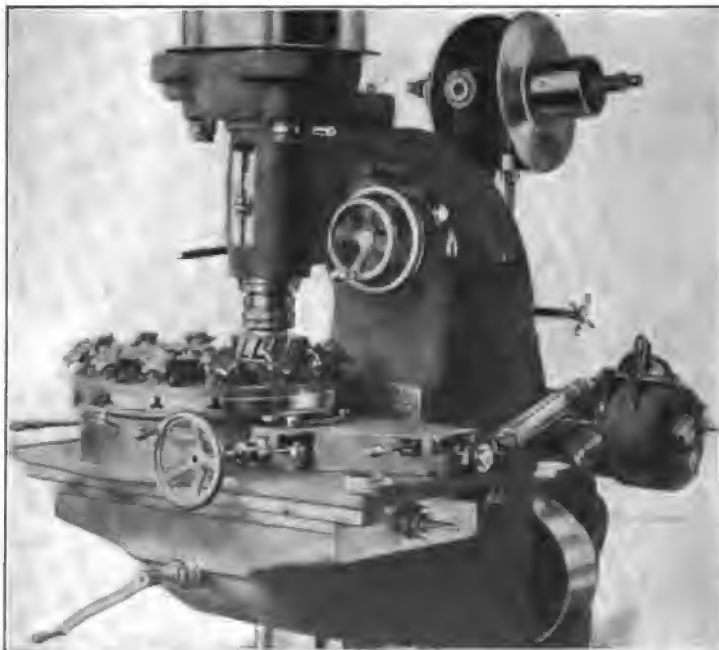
Becker Vertical-spindle Machine for Continuous Circular Milling
